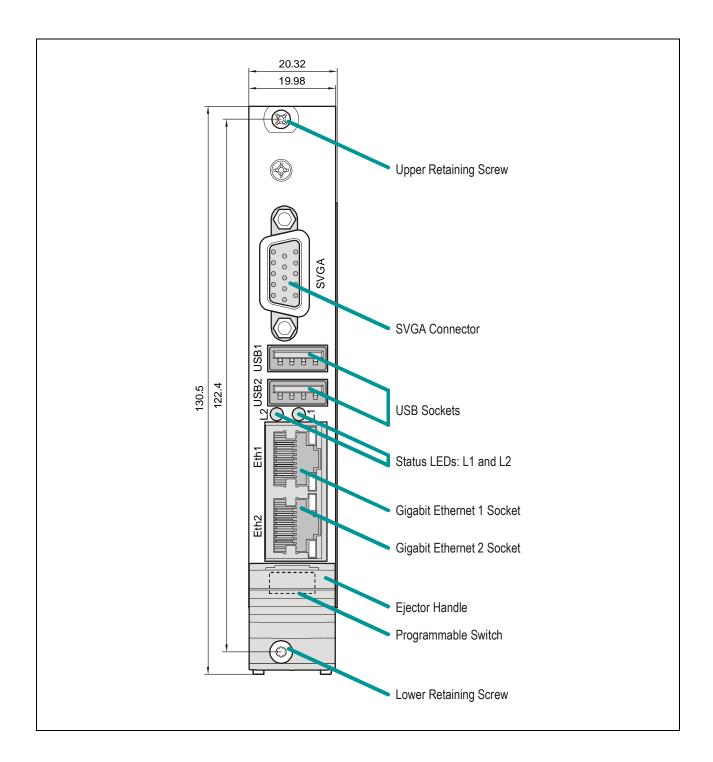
CPC506-03/04 Module Dimensions with R2 Heatsink and MIC588
